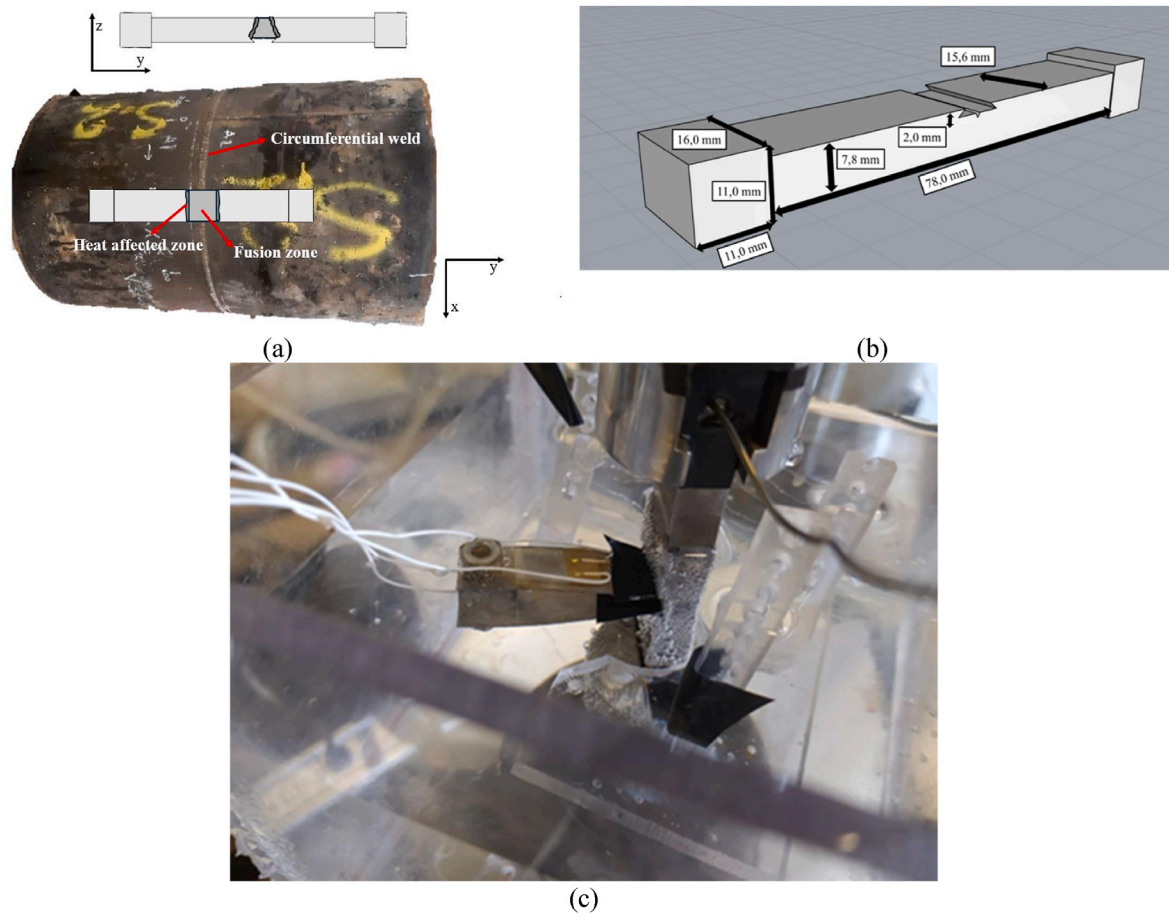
(a) Front and top view of the SENT specimens extracted from the circumferential pipe weld. (b) Sketch of the SENT specimen. (c) SENT and clip on during the test.
